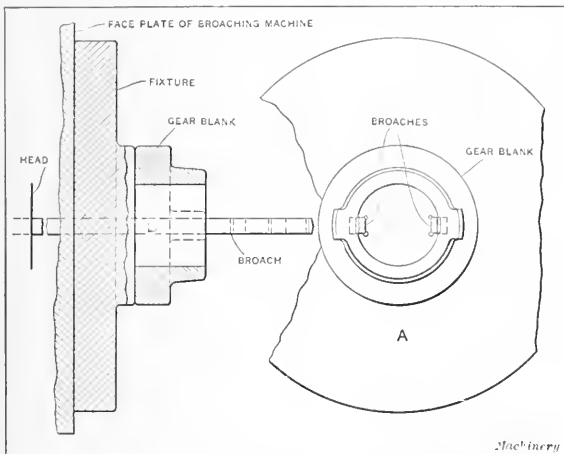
Fixture used for holding Gear Blanks while broaching Two Keyways in One Stroke
